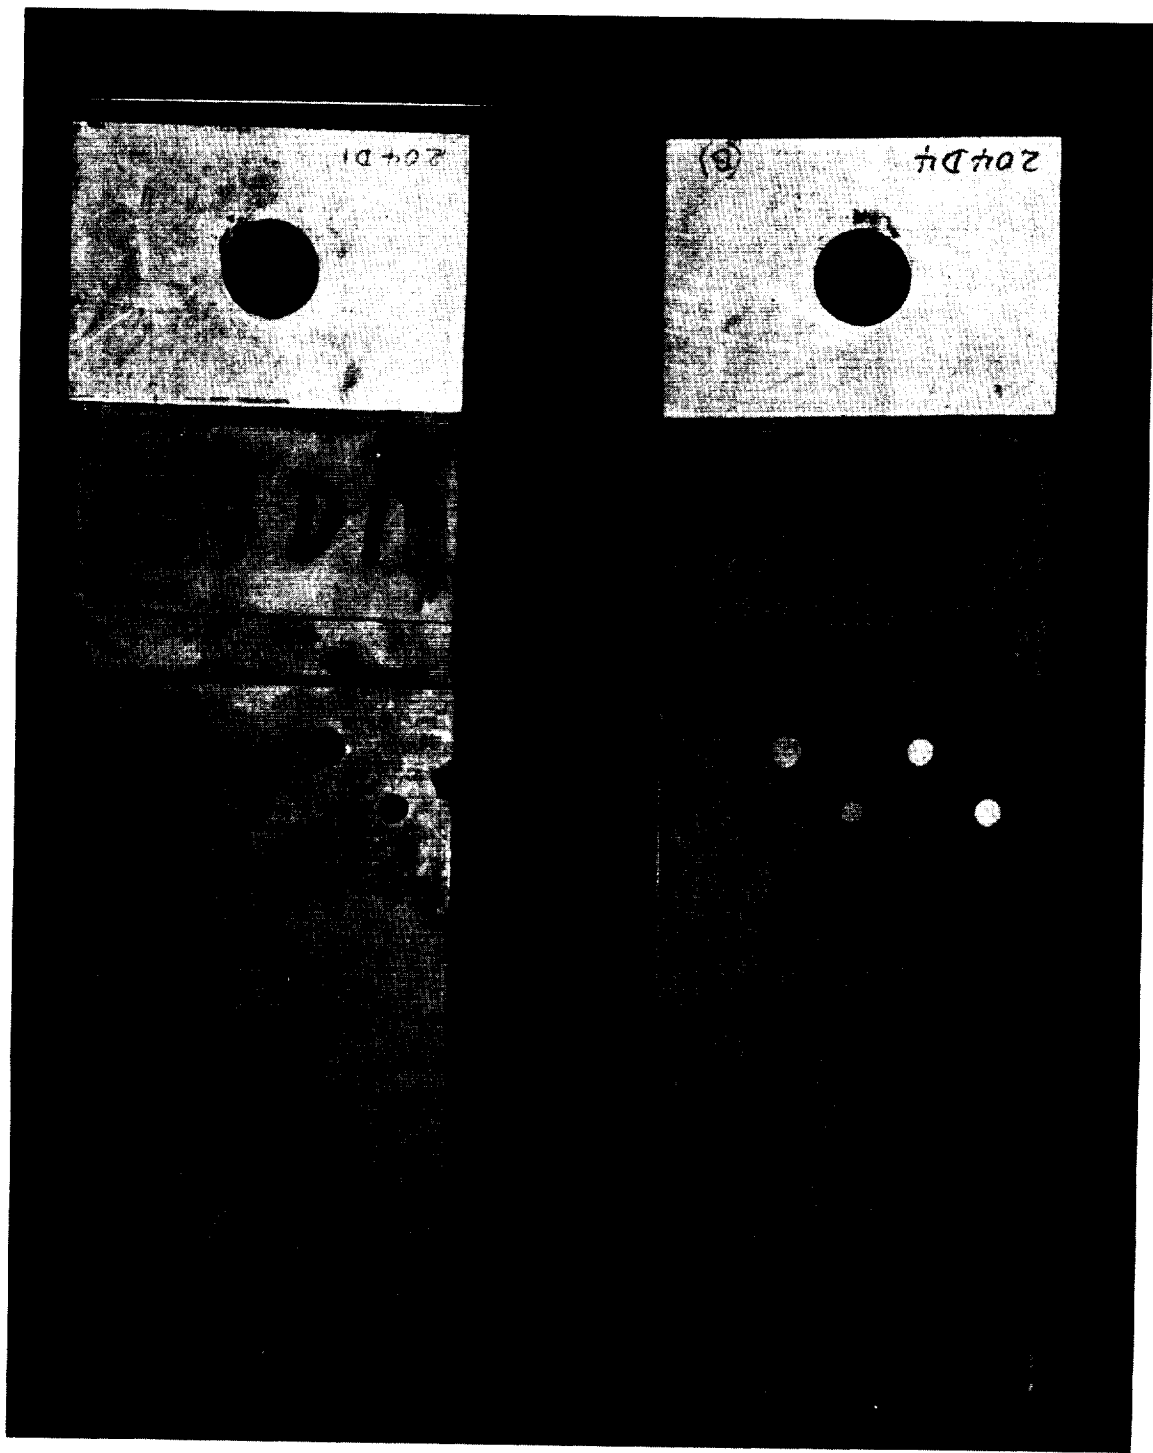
TYPE IVD SPECIMENS - COUNTERSUNK BERYLLIUM RIVETS,
